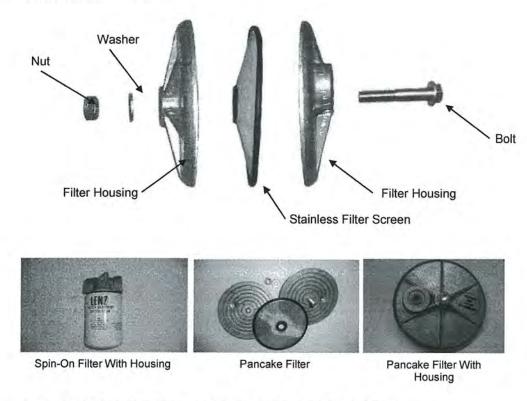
Oil Filter (New Style Spin-On Filter and Old Style Pancake Filter)
